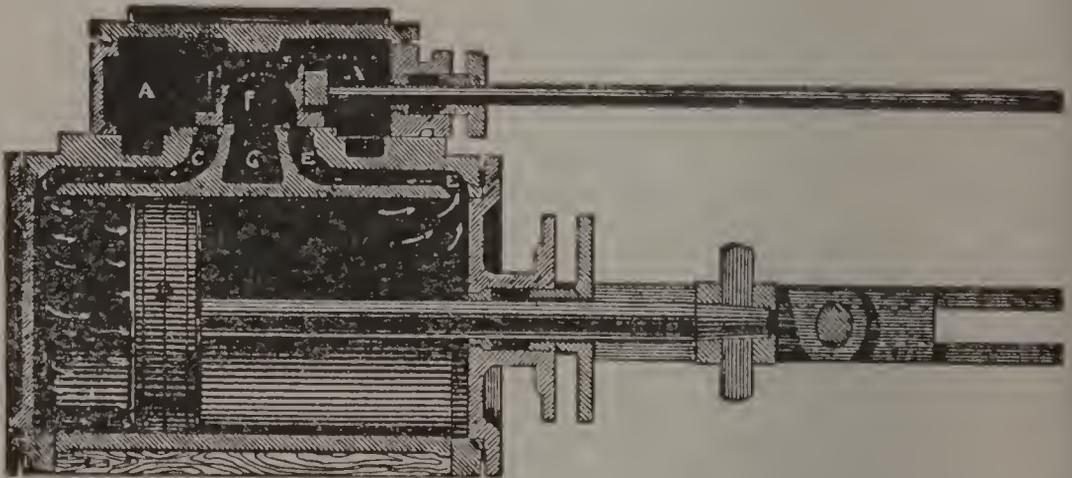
SECTIONAL VIEW THROUGH STEAM CHEST AND CYLINDER.
